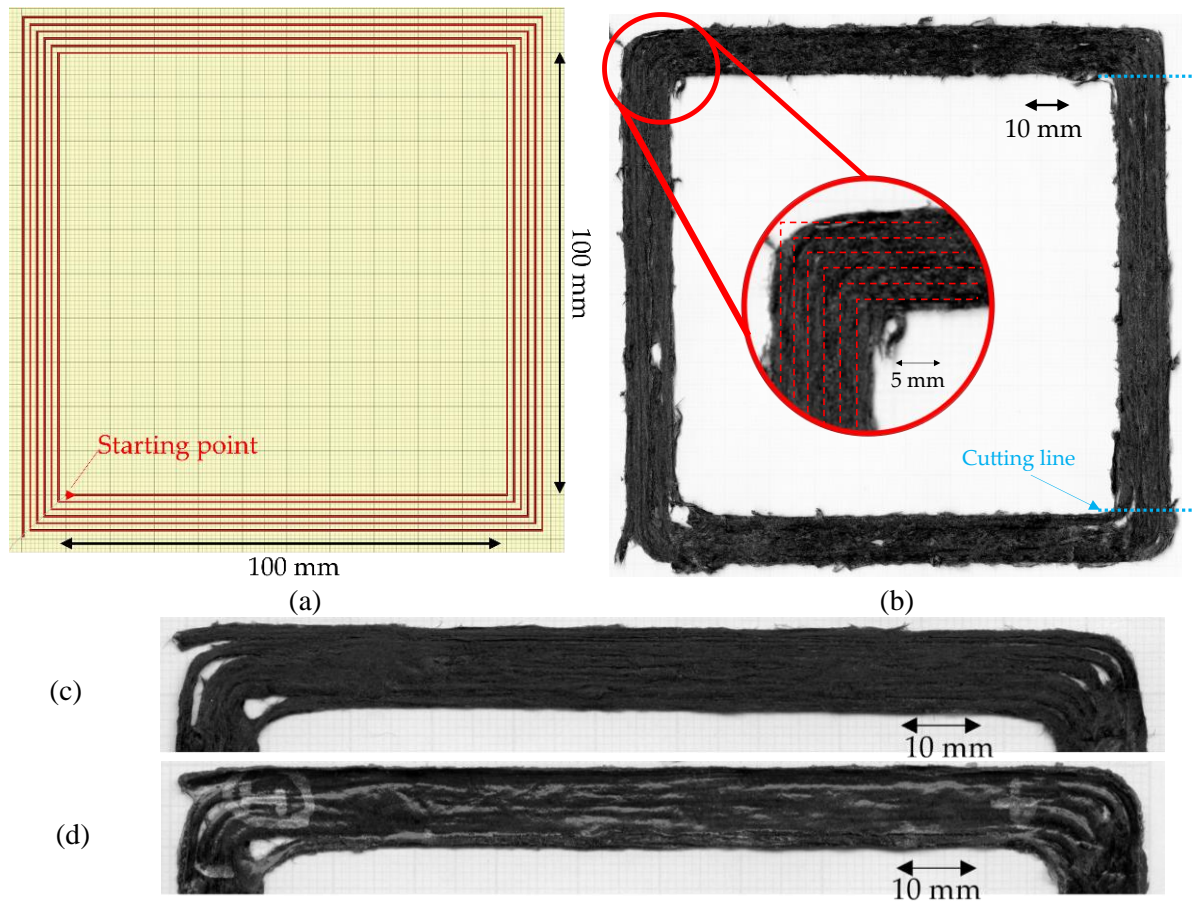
(a) Printing path of large square shape with 90° sharp turning corners to produce four tensile samples starting from inside; (b) top surface of the sharp corner printed part with a zoom-in of a corner [163]; (c) high magnification of the large square as printed; (d) high magnification of the same large square printed after post-printing consolidation.
